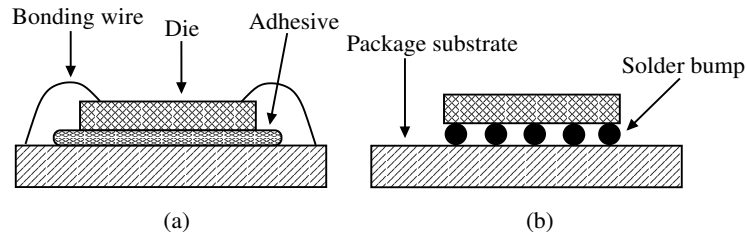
Two different bonding techniques to connect the die pads and package: (a) Wire bonding. (b) Solder bump bonding using flip-chip technique.
